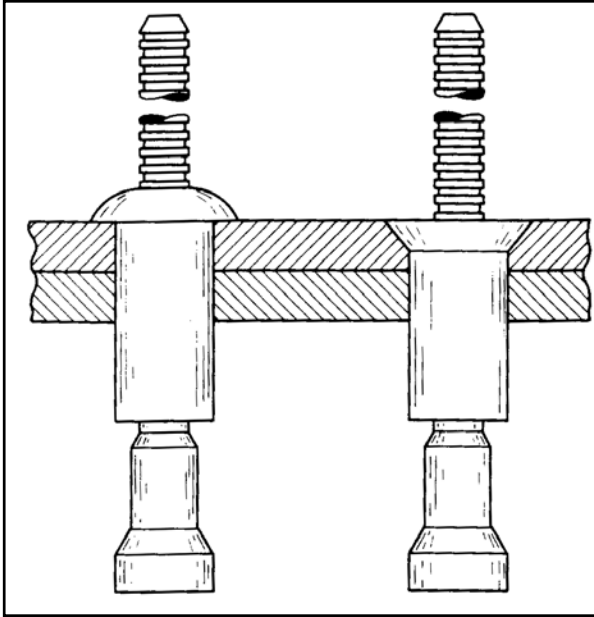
Self plugging friction-lock Cherry rivets.
